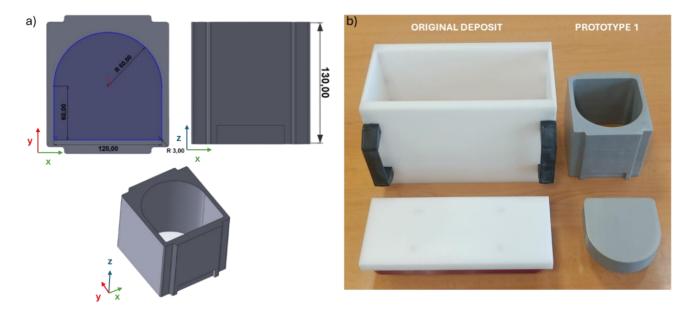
a) Schematic representation of the designed prototype with dimensions in mm. b) Comparison between the original deposit-piston assembly and the prototype of the manufactured assembly.
